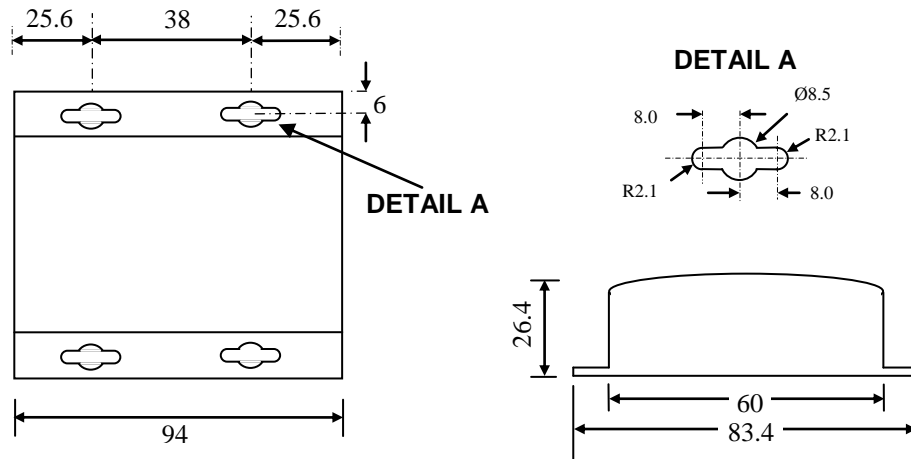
OSD2141A MOUNTING DIMENSIONS
